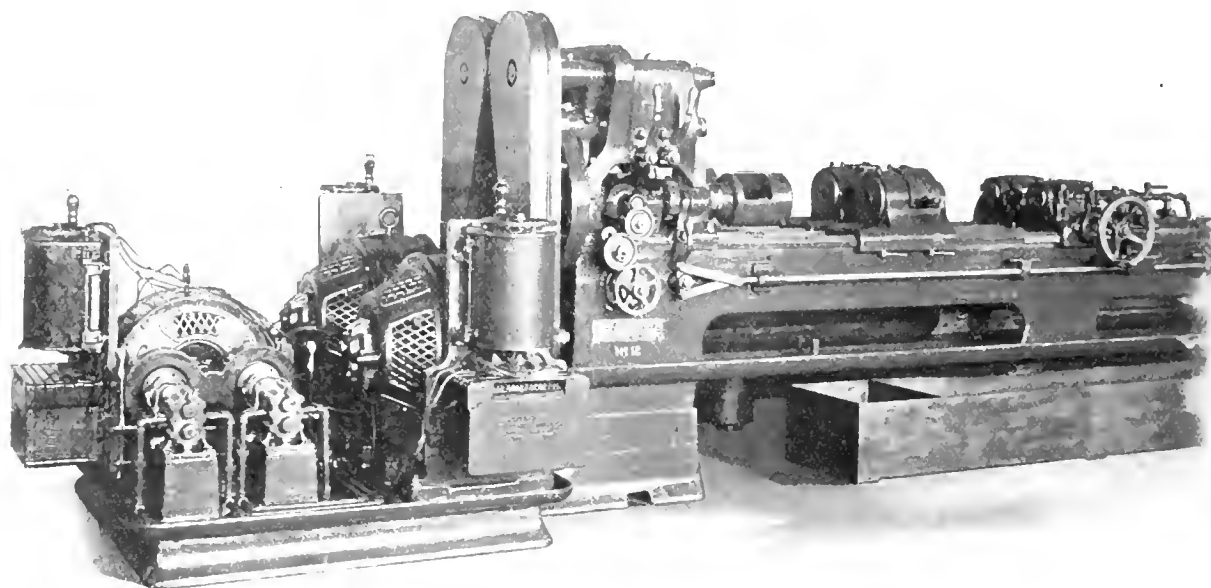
Large, Motor-driven, Pratt & Whitney Gun Barrel Drilling Machine.
